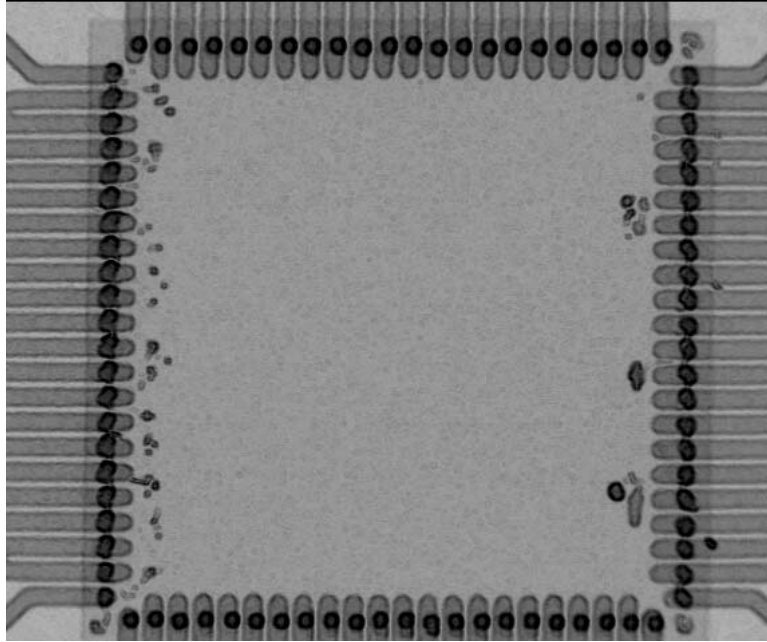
X-Ray Image of Overflowing Solder Under Die
